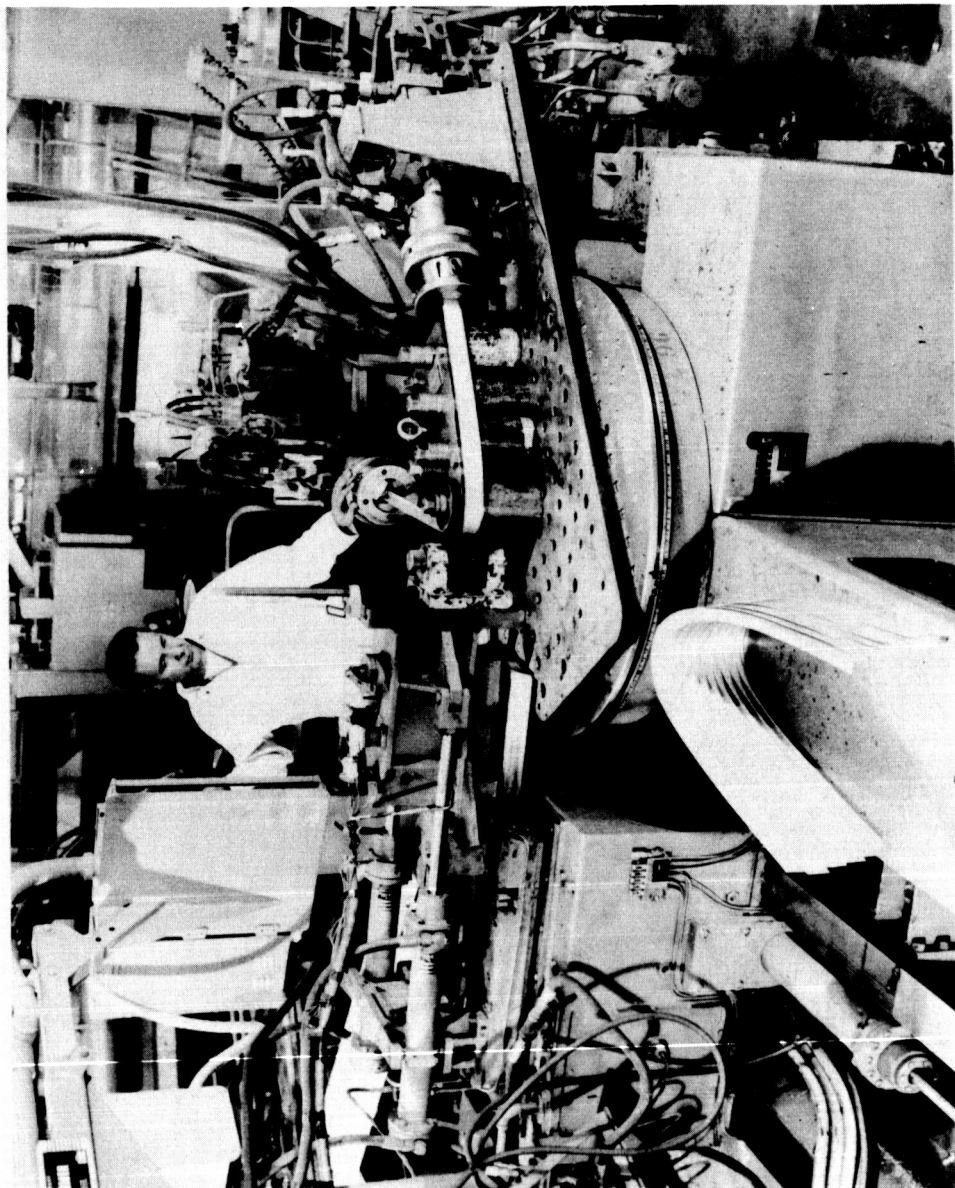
STRETCH-FORMING MACHINE FOR SECTIONING
